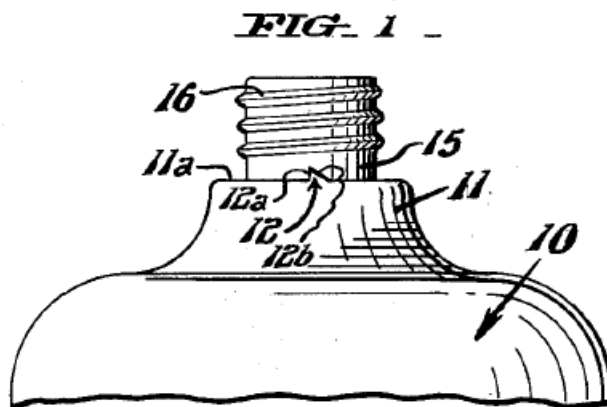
shows container 10 with neck 15, shoulder portion 11, flat surface 11a, and saw-tooth protrusions 12. *Id.* at 1:68–2:24. Neck 15 includes spiral thread 16, which is designed to complement the thread
